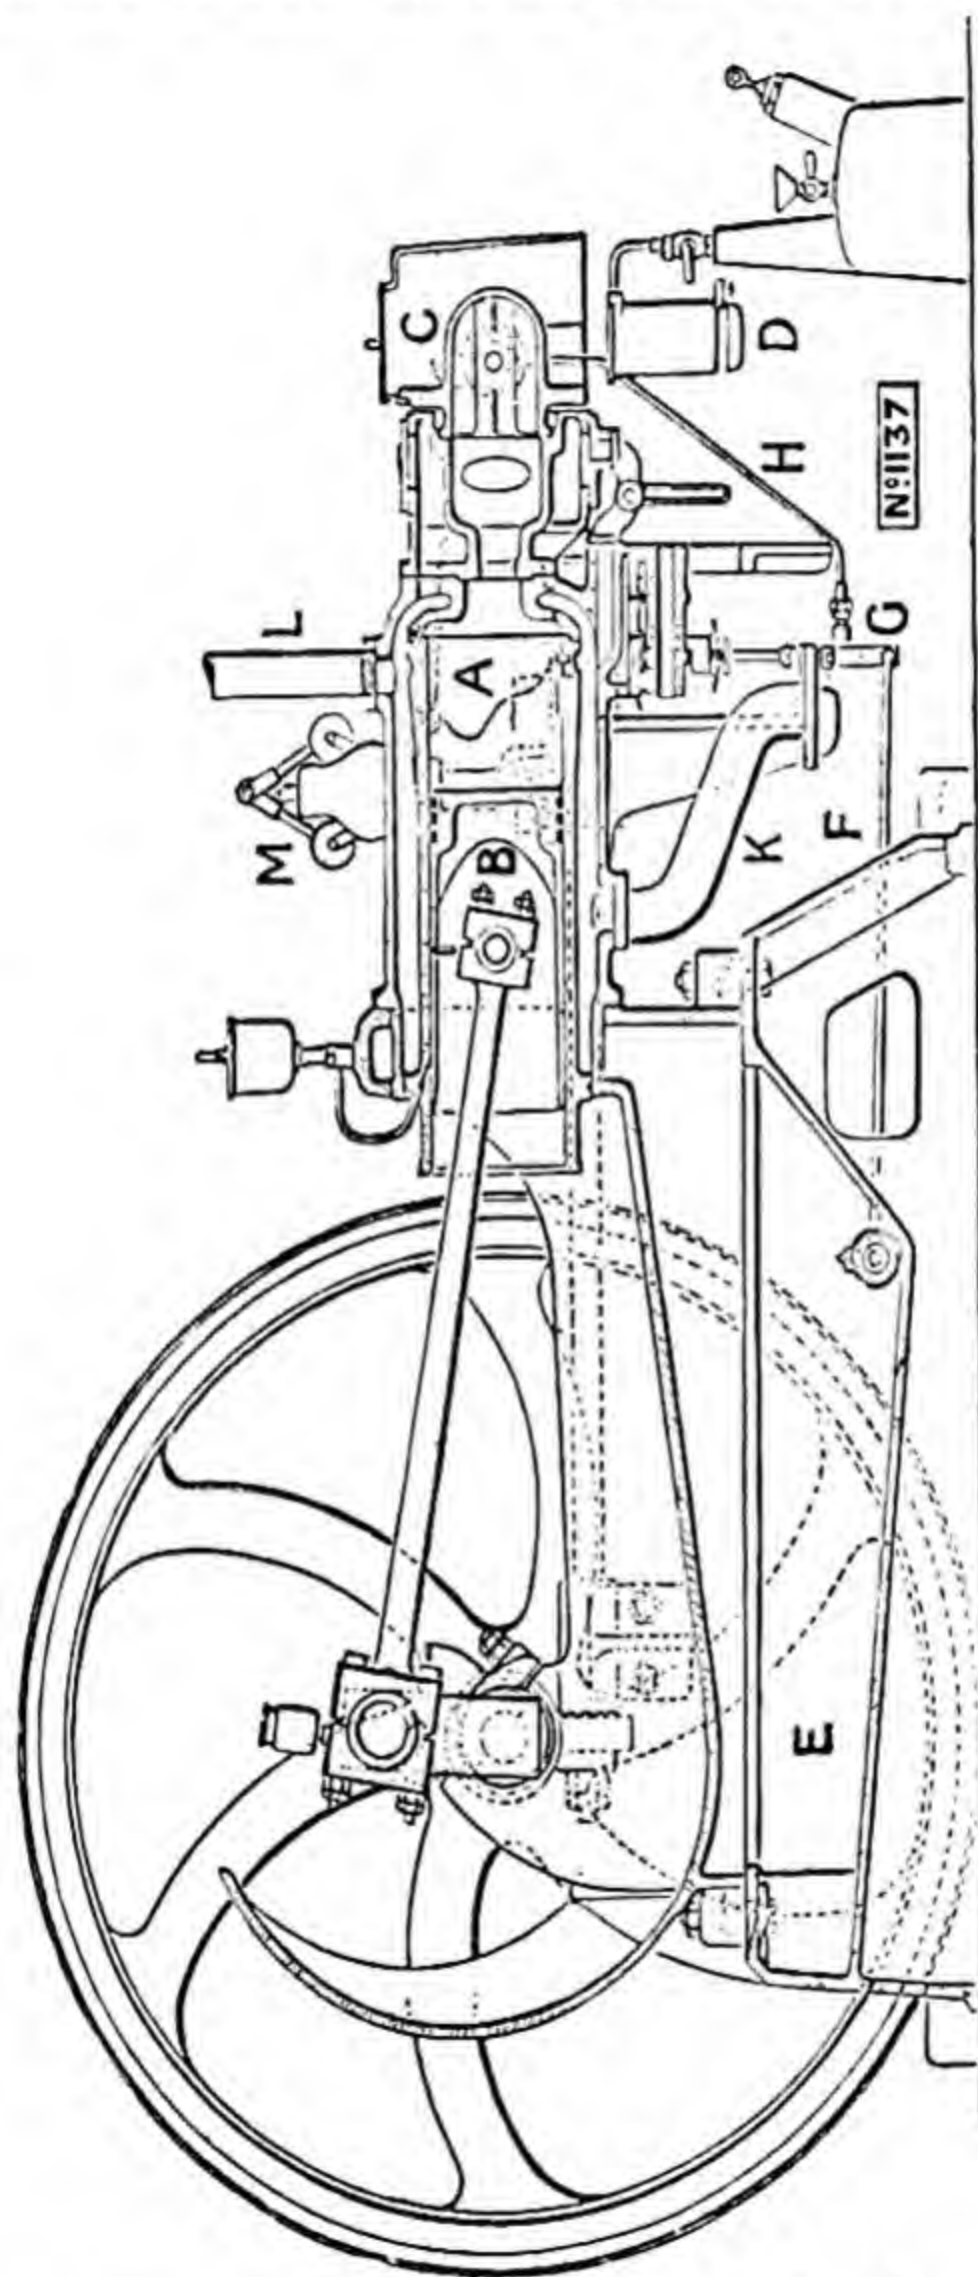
Sectional side elevation of the Hornsby-Akroyd oil engine.
